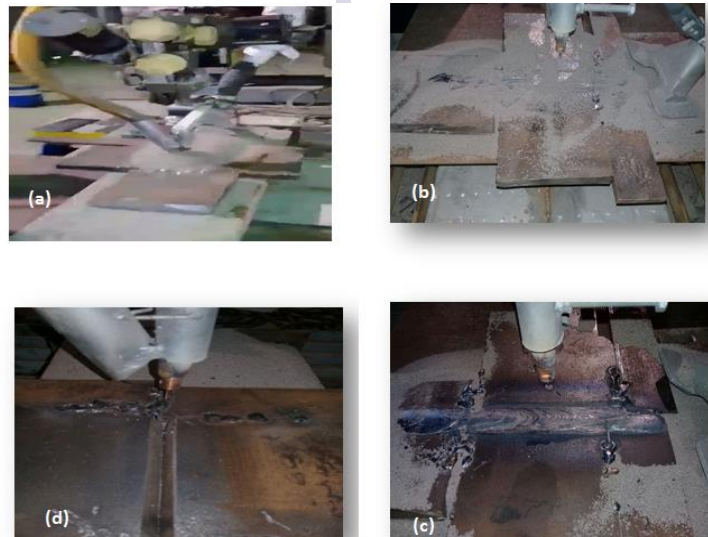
Schematic Presentations of the Sequence Steps (SAW) of the Samples, (a&b) Specimens with Different Agglomerated Fluxes, (d&c) Welding Parameters, During Welding Process.
